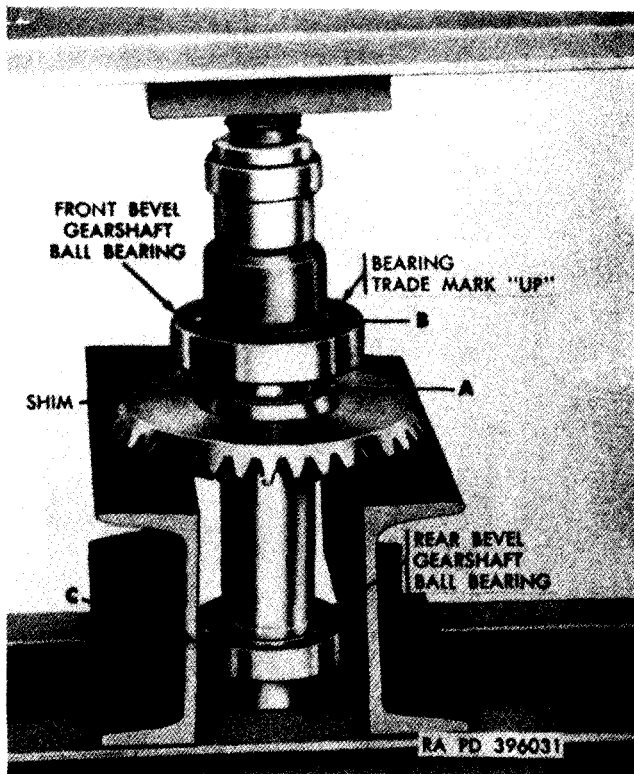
Pressing fan driven gearshaft into lower drive gearshaft ball bearing.
